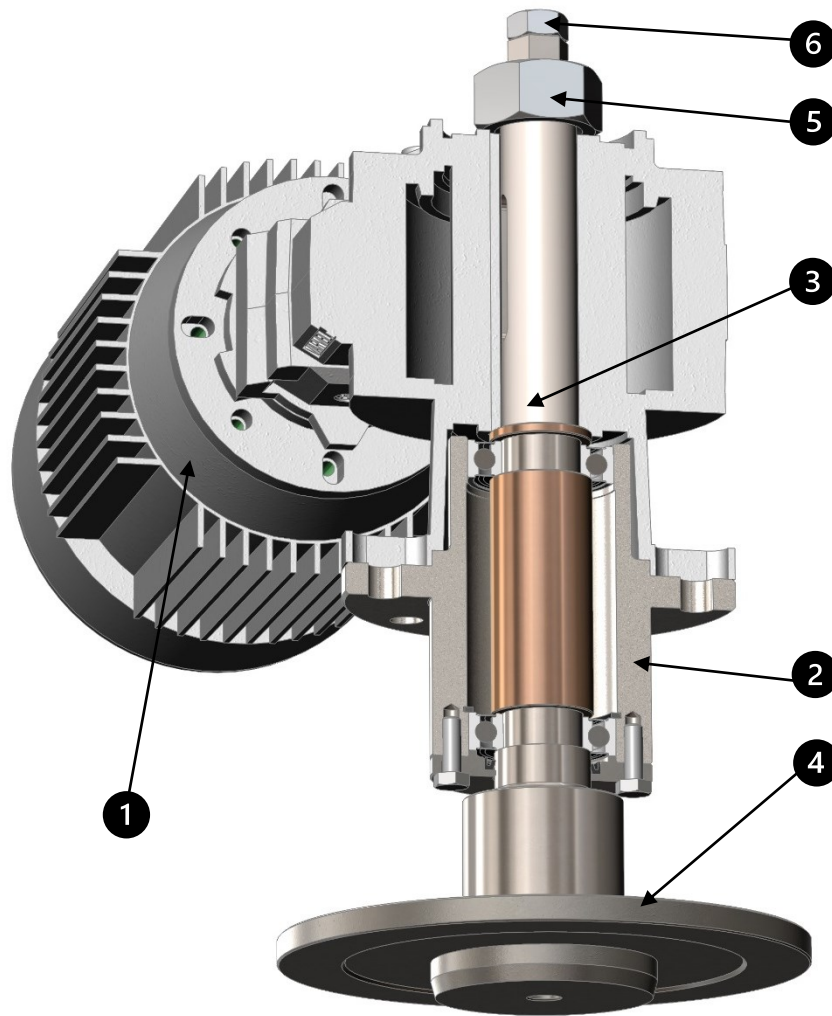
Spindle. (1) Gearmotor. (2) Housing with internal assembly. (3) Shaft. (4) Fixture-disc. (5) Shaft tightening nut. (6) Fixture-disc tightening nut.
